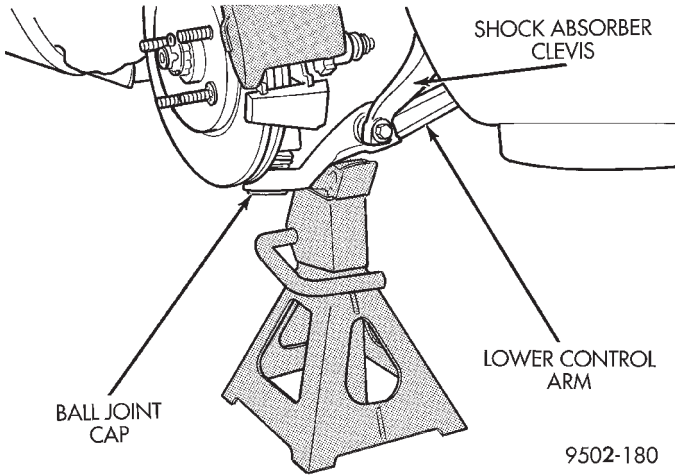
Lower Control Arm Correctly Supported By Jack Stand
